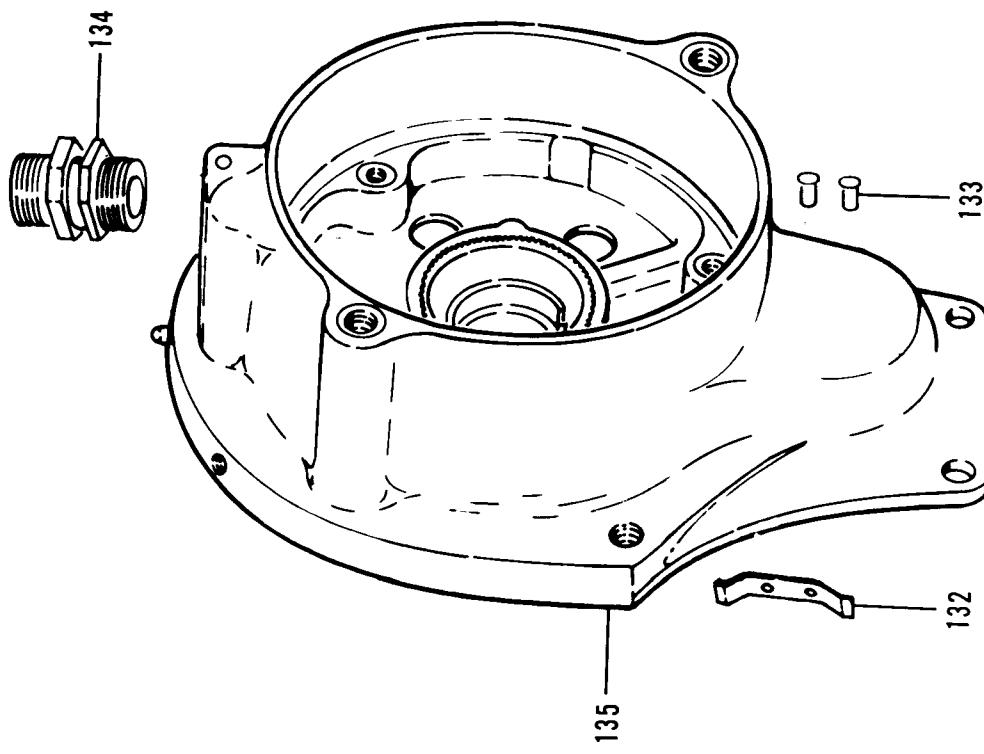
Magneto, Ignition (Housing Assembly Gear) (Sheet 7 of 10)
